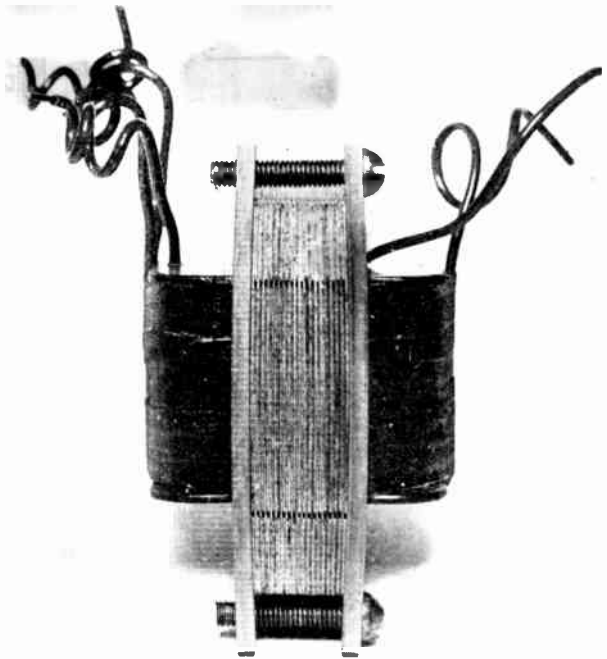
HOW NOT TO CLAMP THE STAMPINGS.
